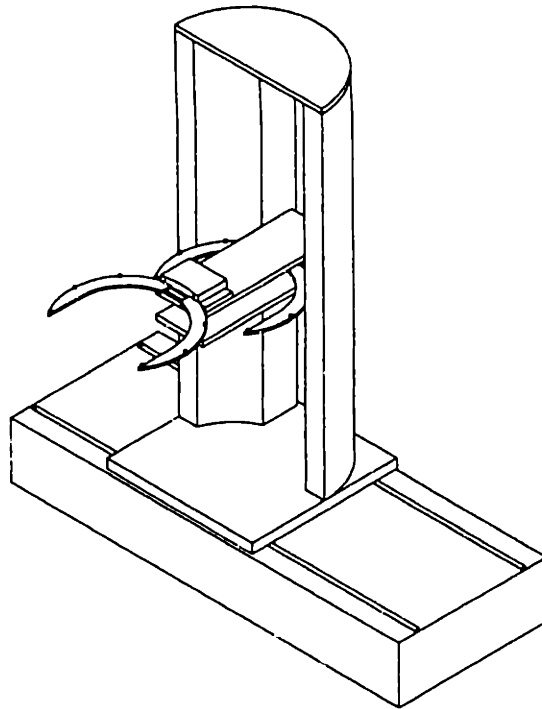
Wafer handler concept with linear final joint and a fixed tower.
